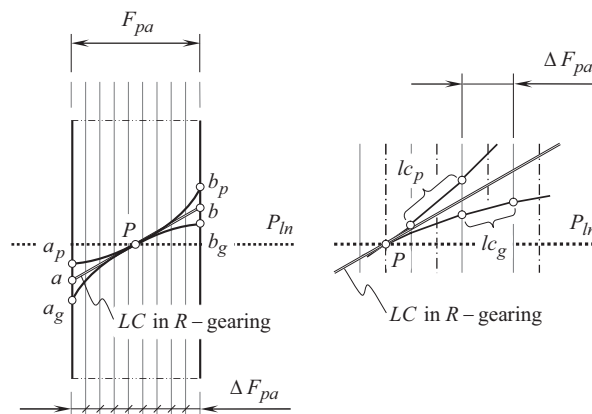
On the adopted concept for tooth flank generation in gears for  $S_{pr}$  – gear system.
